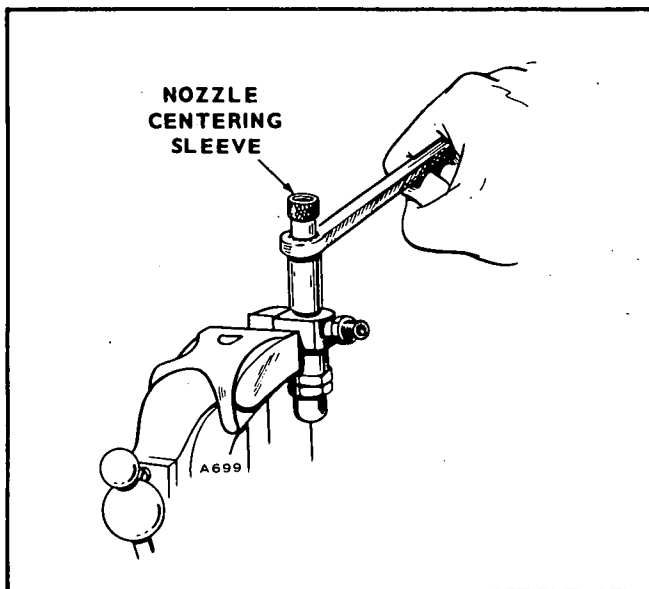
TIGHTENING NOZZLE CAP NUT
